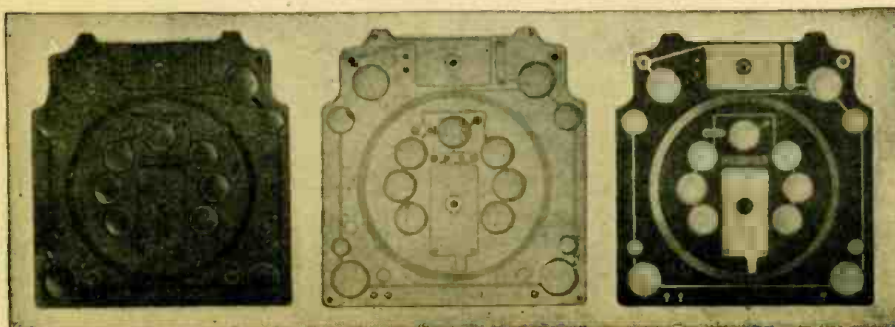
a (left)—Molded blank; 2-b (center) after spraying; 2-c (right) after face-milling.
